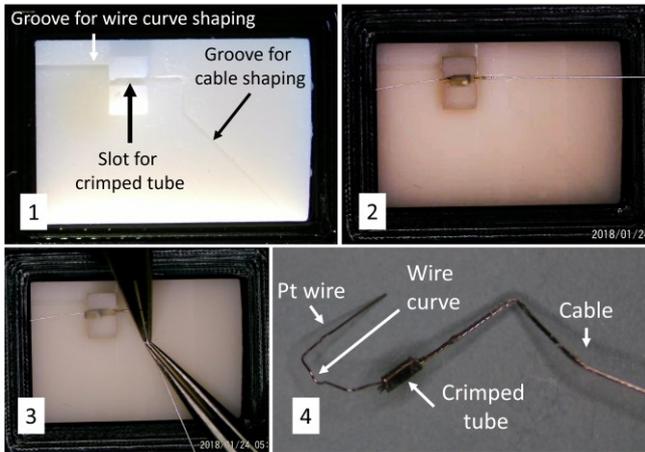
(1) Bending mold for shaping the left contact. It has a slot to hold the crimped tube while it is bent. The mold has 2 grooves: one is used as a reference in shaping the cable and the other is for shaping the wire curve. (2) Contact placed and fixed on the mold (3) Contact shaping (4) Final contact shape.
